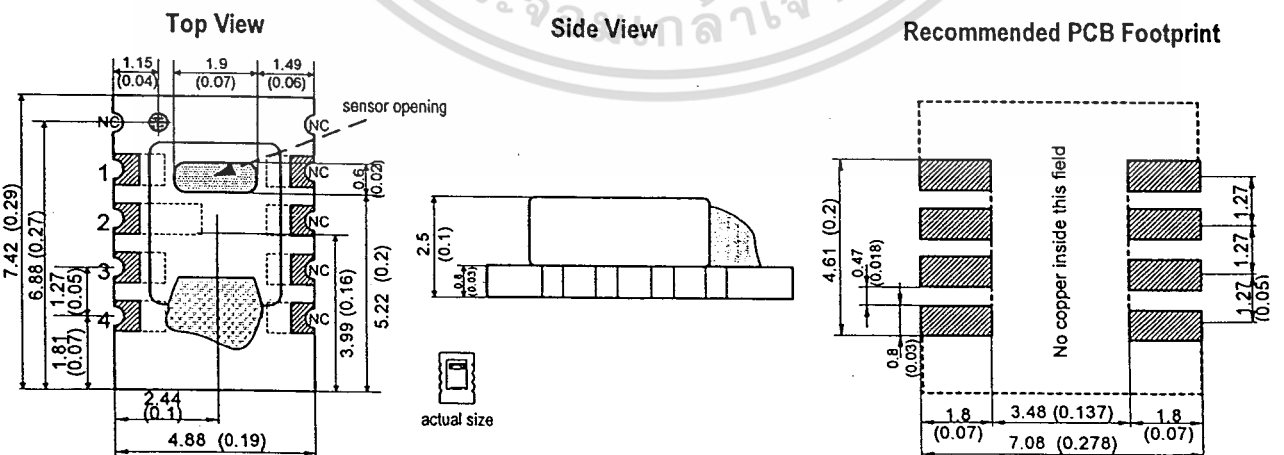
SHT1x drawing and footprint dimensions in mm (inch)
